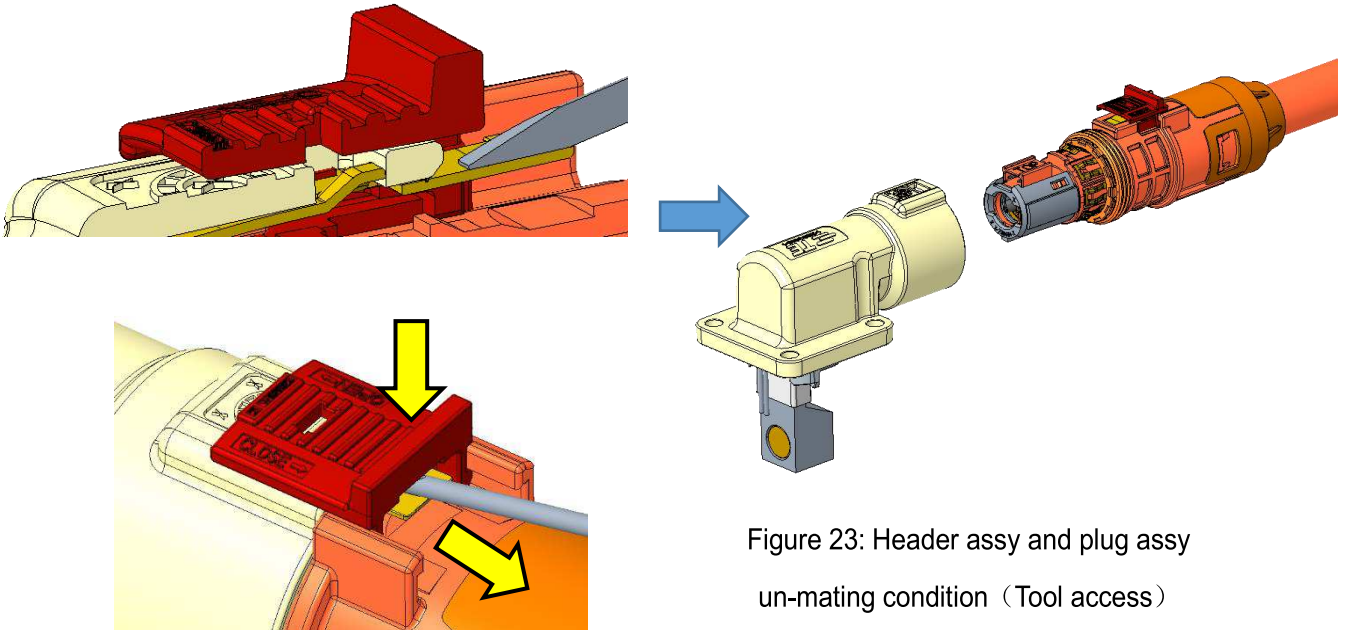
Header assy and plug assy un-mating condition (Tool access)
